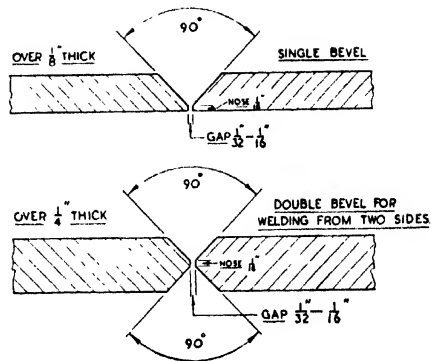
EDGE PREPARATION FOR CAST-IRON WELDING
